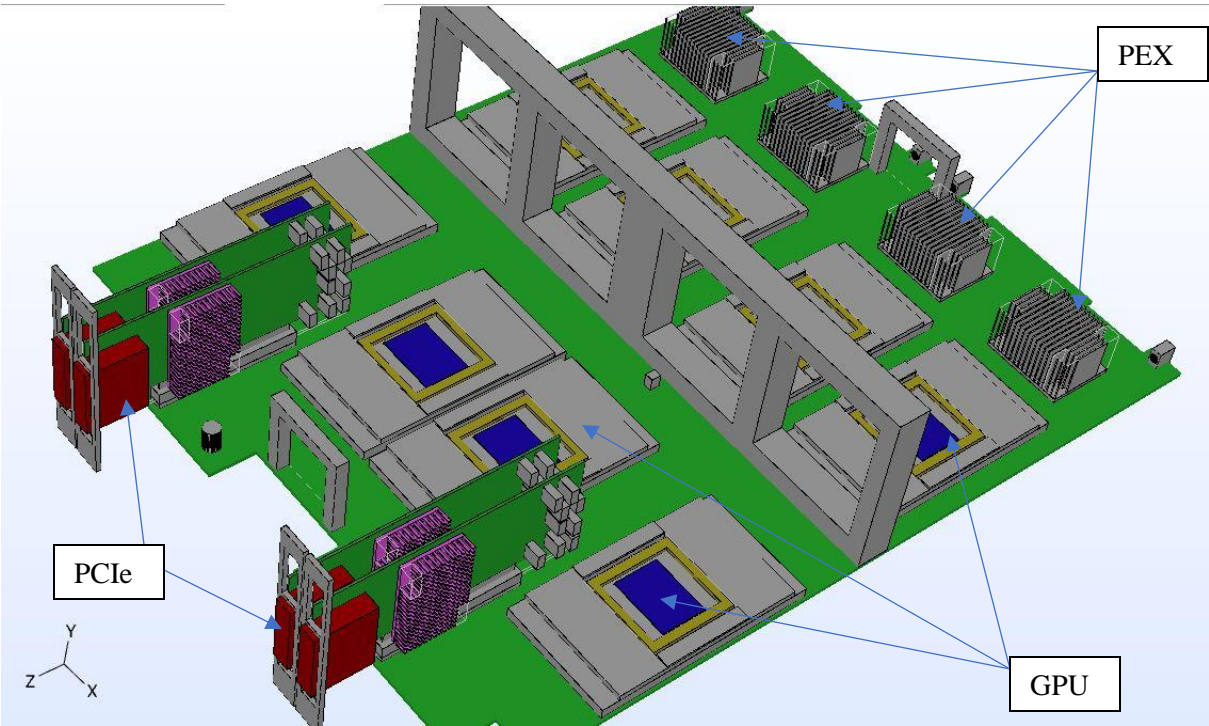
4 Baseboard PCB with GPU, PCIe card and PEX switch
